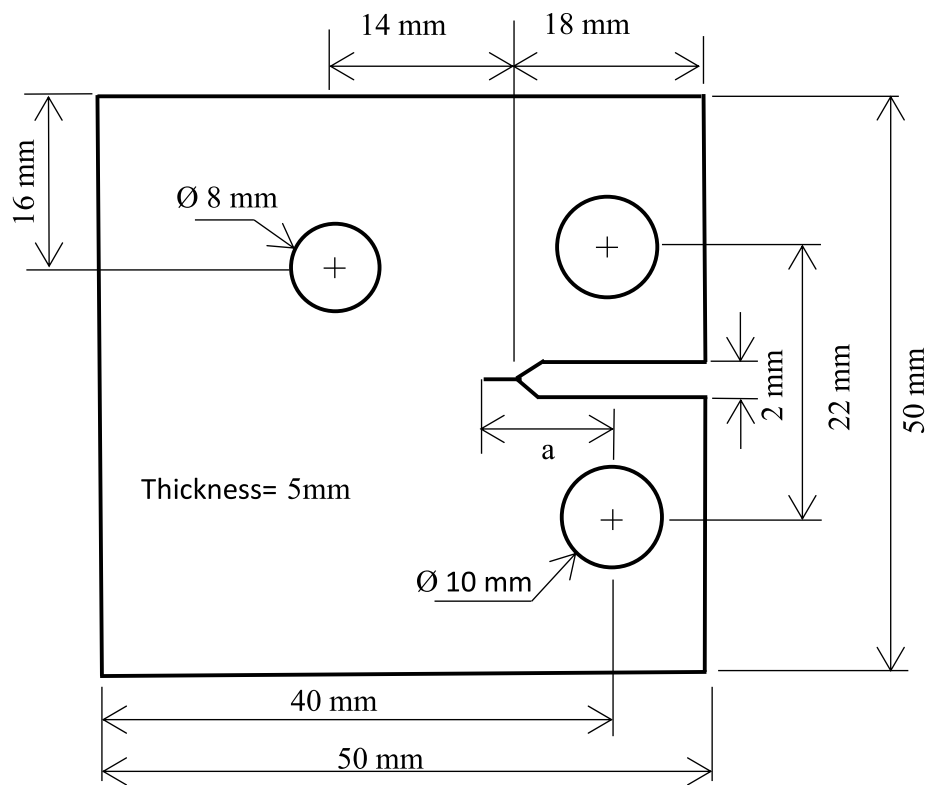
Geometrical dimensions for Al 7075-T6 modified CT specimen [53].
